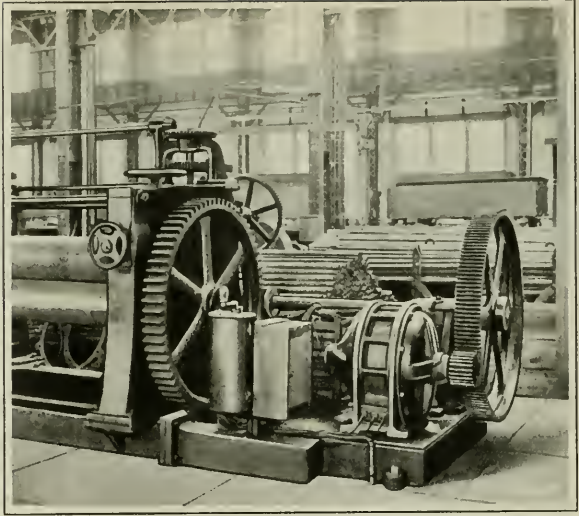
Straightening Rolls driven by a Wound-rotor Motor having Drum Type Control
